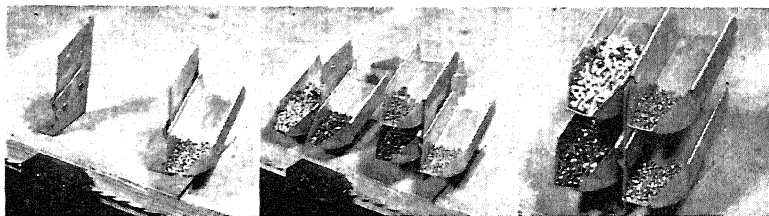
Standard container for small parts and support which holds one, two, three, or four containers.
